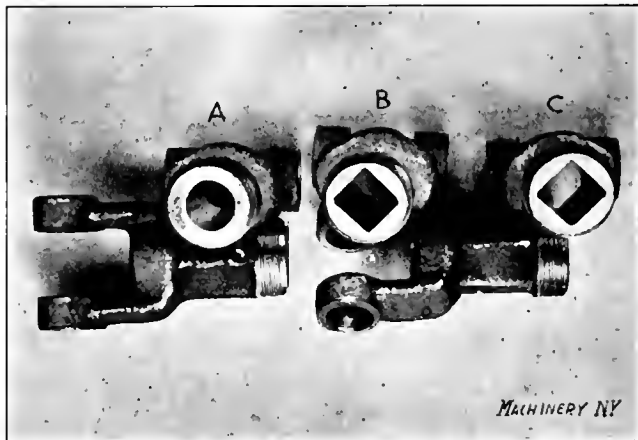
Universal Joint Forks, showing Drilled, Machined, and Broached Holes
